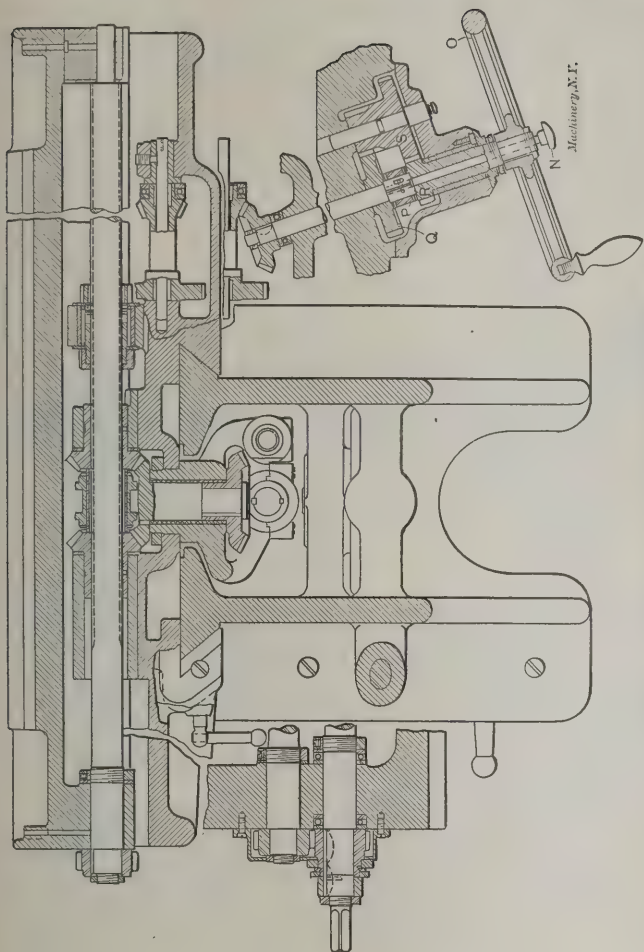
Details of Table Feed and Hand-wheel Gearing.
